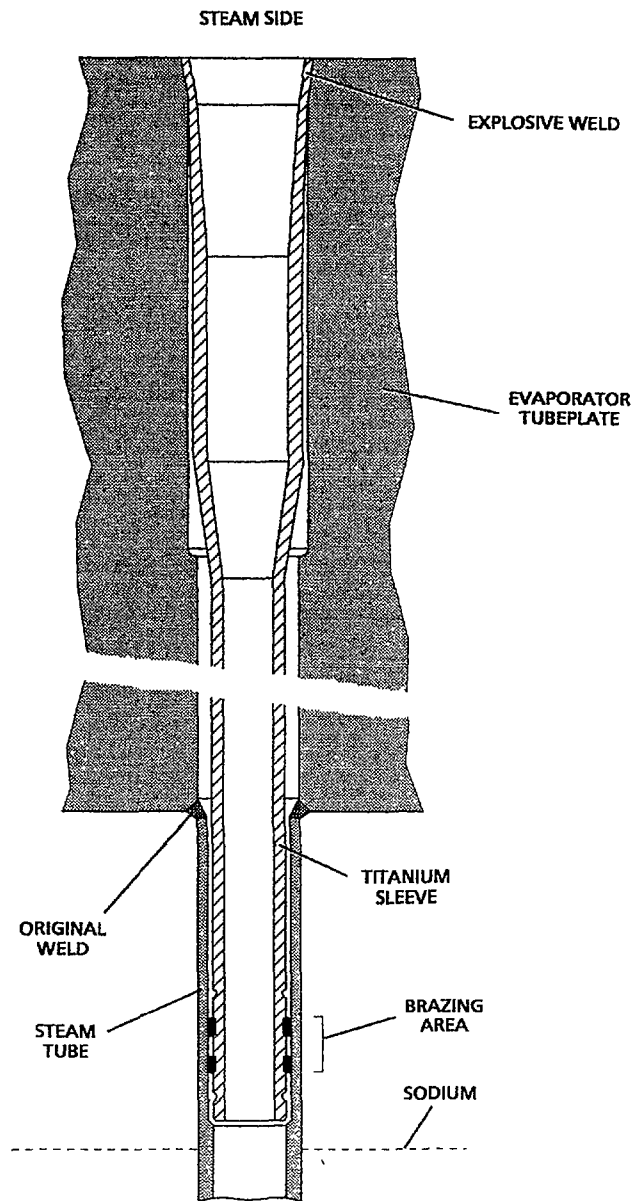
A PFR Evaporator Weld Repair Sleeve
